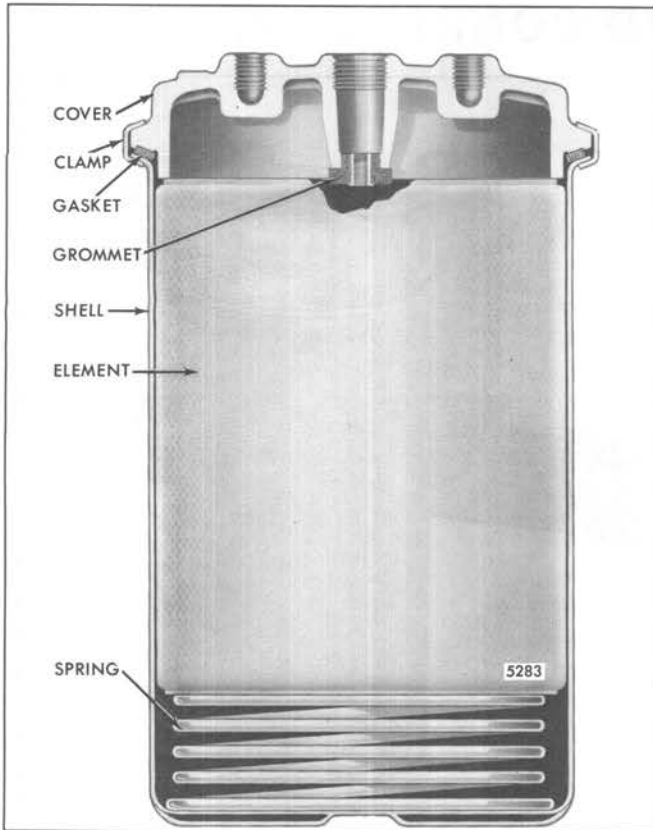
Coolant Filter and Conditioner (Clamp-On Type)
